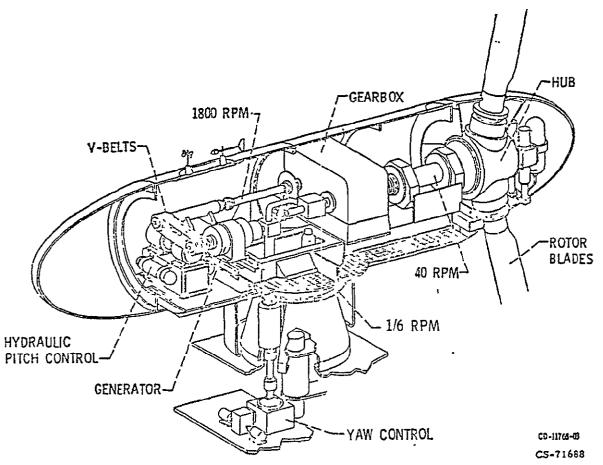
100 kW Experimental WTG 100 kW Wind Turbine Drive Train Assembly
